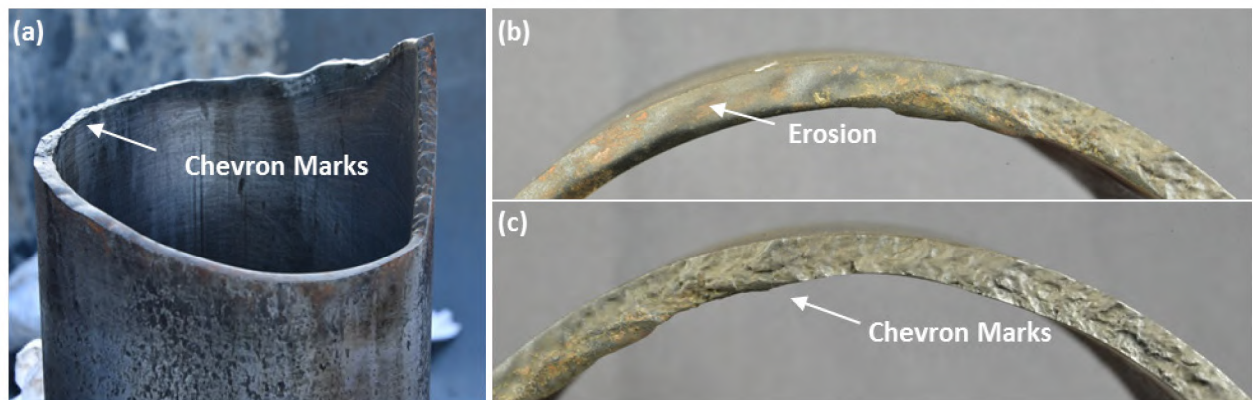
Fracture Surface During (a) Extraction from C022 and After (b) Cleaning with Sentinel 909
